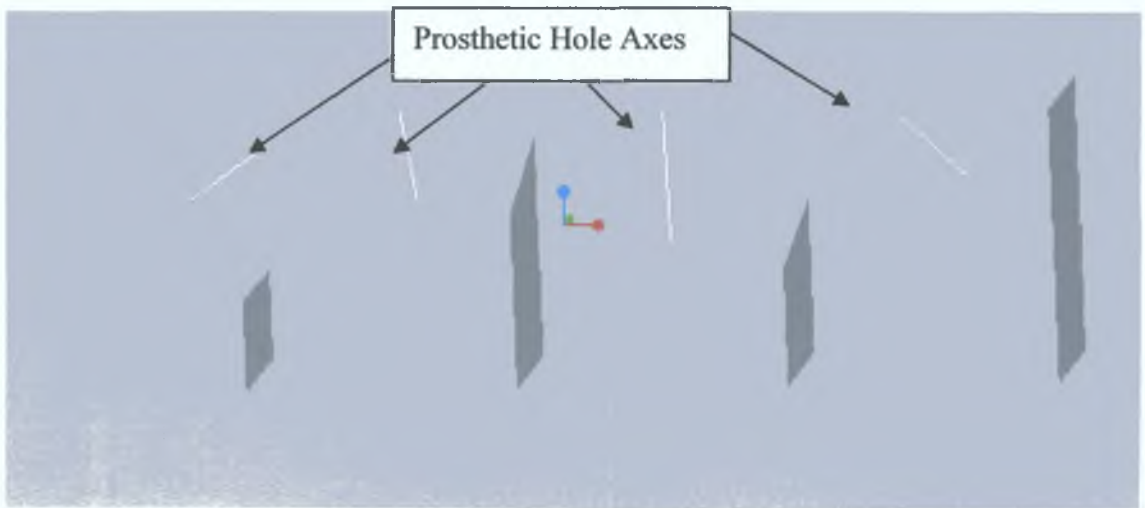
Milling Fixtures with Planes Normal to the Axes Holes.
